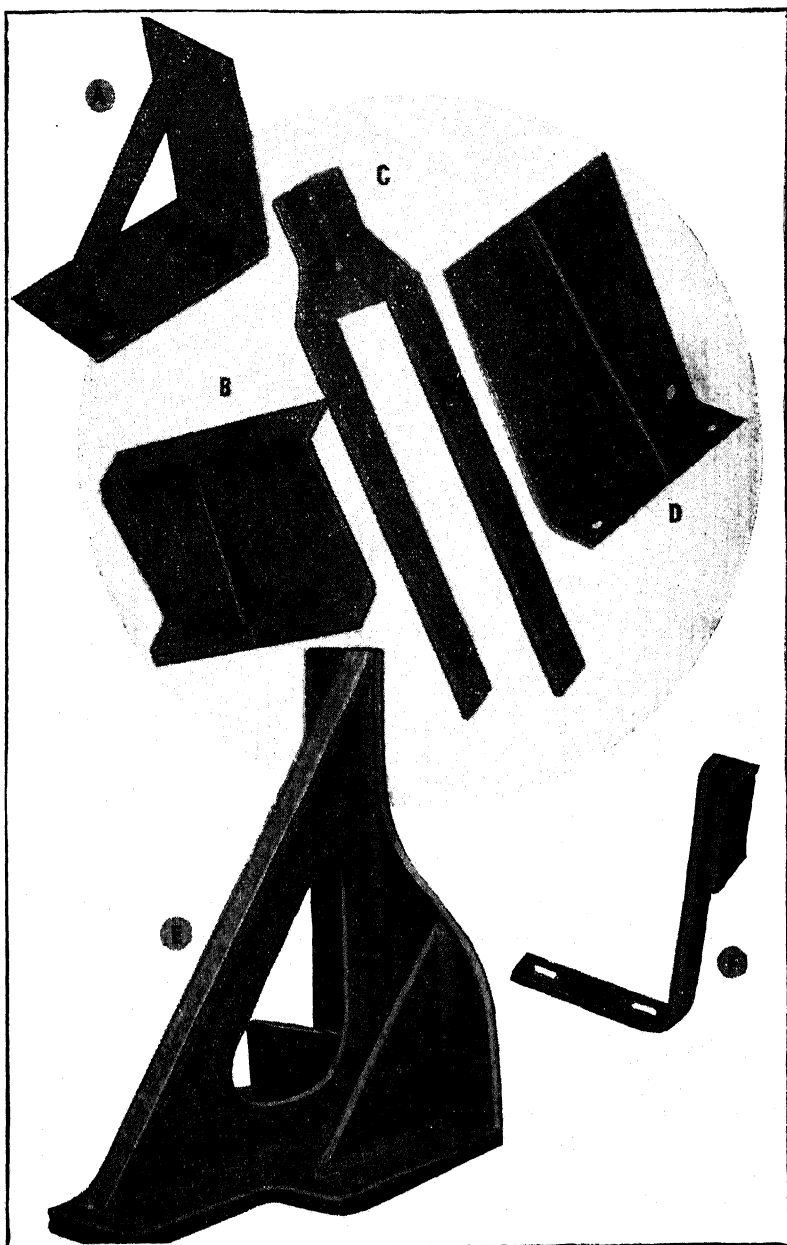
BRACKETS—(A) Engine bracket for crawler shovel. (B) Diesel engine radiator spacer bracket. (C) Brake bracket for crawler shovel. (D) Chain casting support. (E) Steam locomotive bugger beam bracket. (F) Woodworker splitter knife holder.
